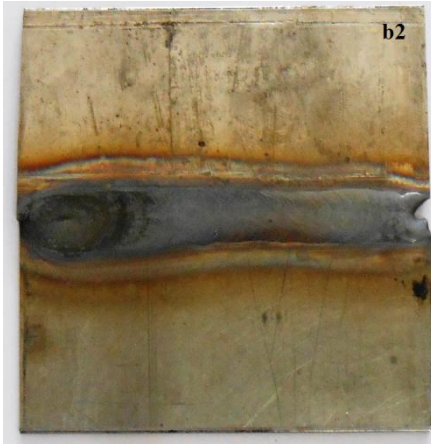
Weld bead shape of sample at face and root, welded at 1mm/s with high heat input
